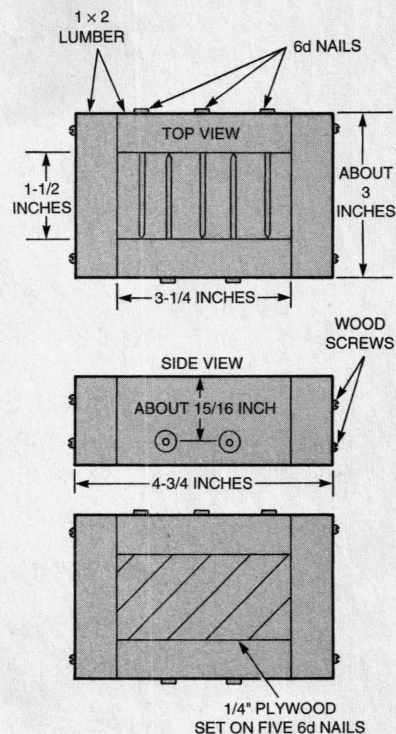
If you want to pot the Jumper Cable Wizard, this wooden-mold pattern will work nicely. Use wood screws to hold everything together. If the JCW won't come out of the mold, you can always take the mold apart!
